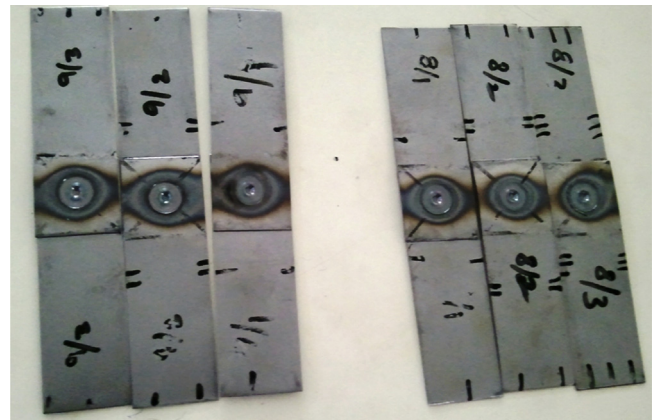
Some of fabricated friction stir spot welds.
